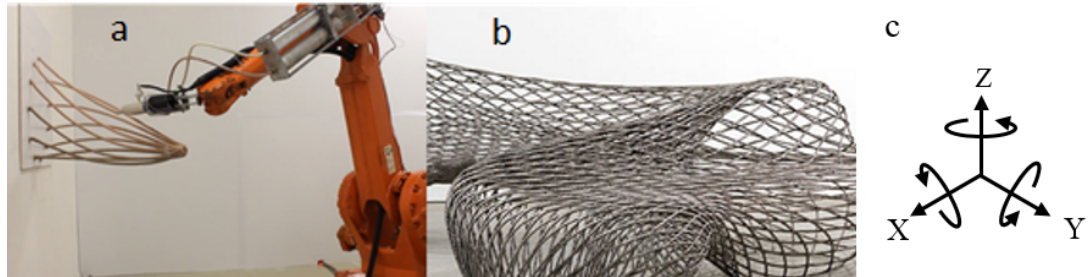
Anti-Gravity Object Modelling: (a) Rapidly curing material and 6 axis deposition allows for printing in any direction, from [163]. (b) A metal bench printed using 6-axis deposition, utilising a robot arm equipped with a welder as the extruder head, from [164]. (c) The extruder can move in 6-axes due to the serial robot mechanism.
